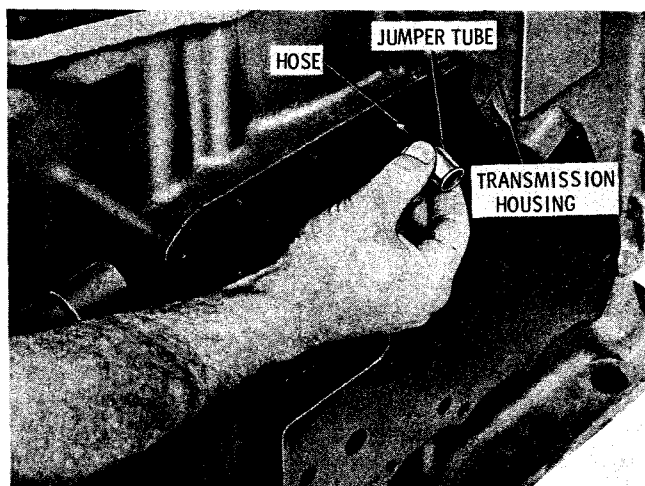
Installing high-splitter clutch oil jumper tube S1683
